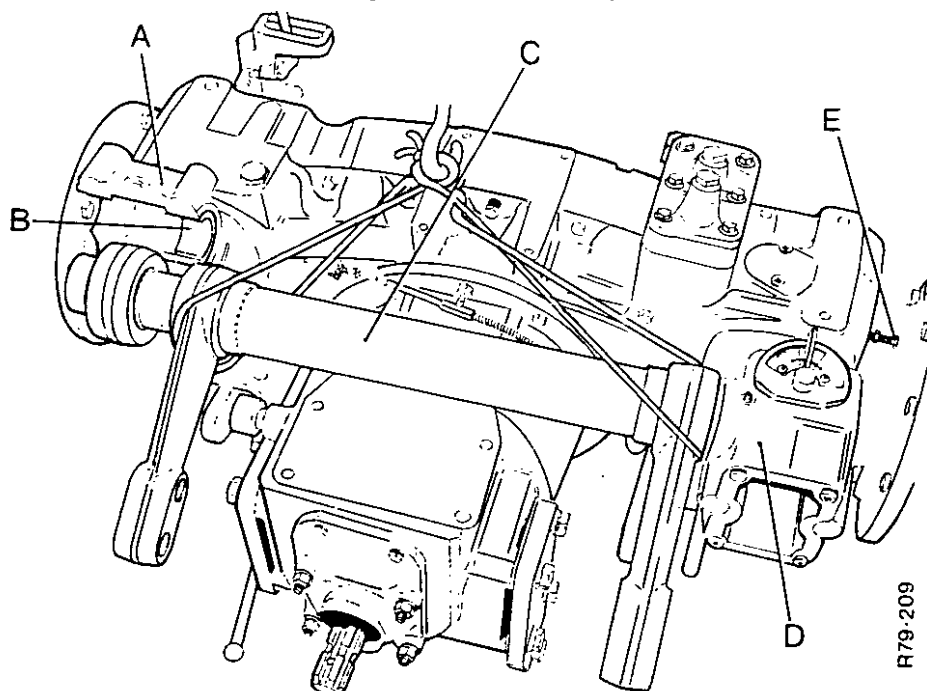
INSTALLATION OF THE RAMSHAFT FOR 12 SERIES TRACTORS
